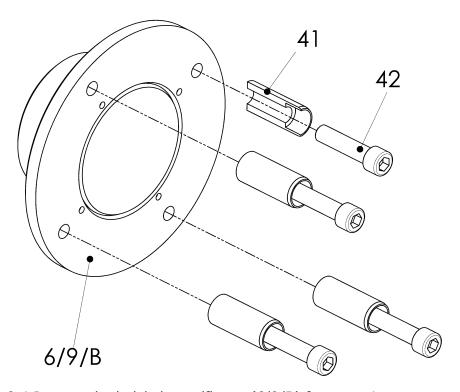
Prepare the hub/adapter/flange (6/9/B) for mounting (Type 008A-00400..00600-.S..)
